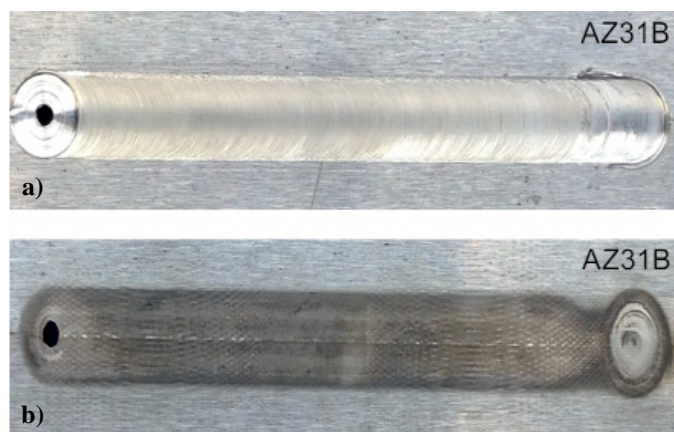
Photographic view obtained FSW joint of the AZ31B magnesium alloys, a) face of joint, b) ridge of joint
